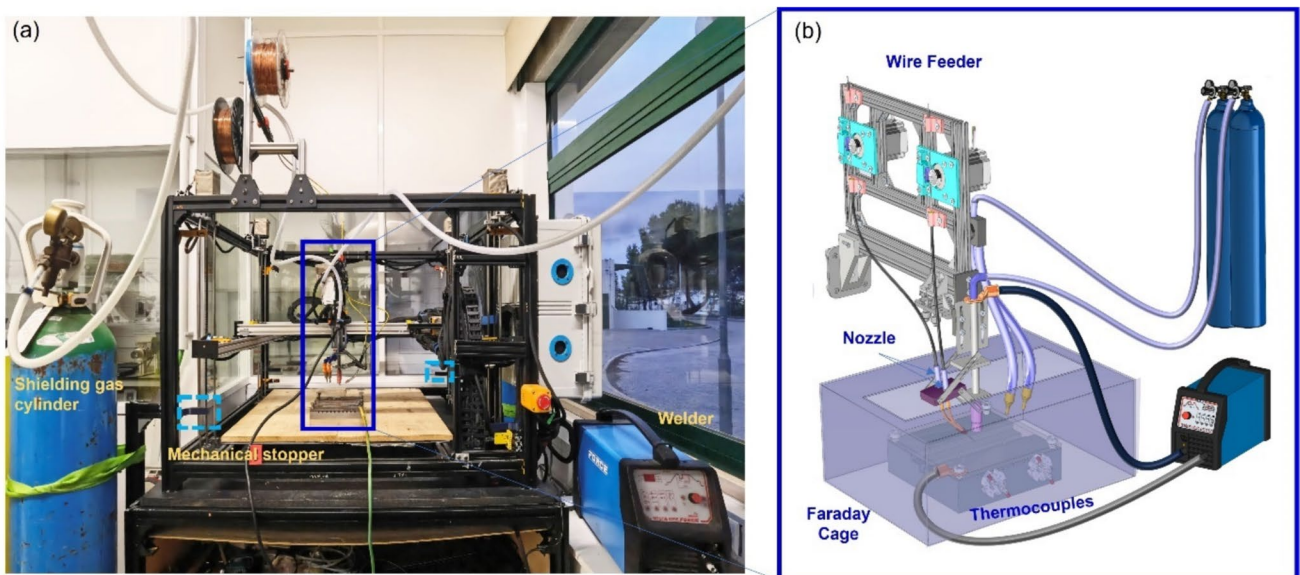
(a) Self-developed WAAM machine, (b) schematic of welder and wire feeder system with shielding gas setup
